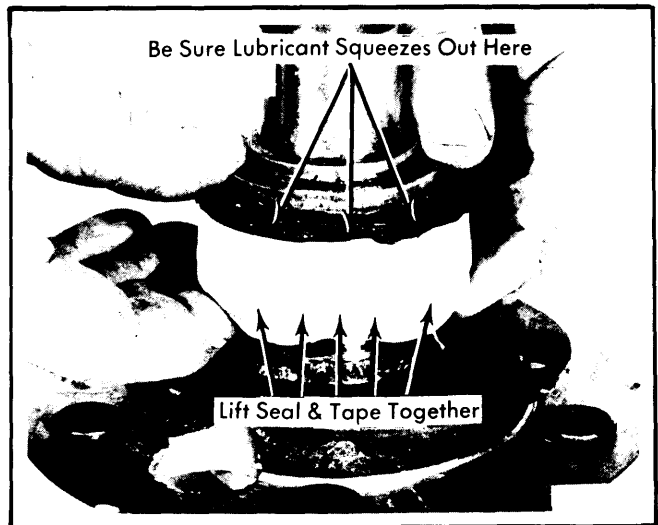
Correct Procedure for Lubricating Installed Bearing
